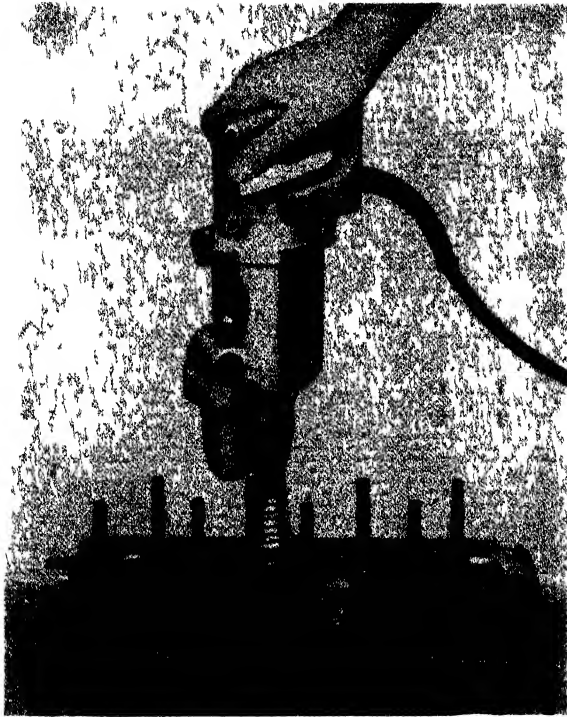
Special Valve Seat Abrasive Stone Cutter used with
